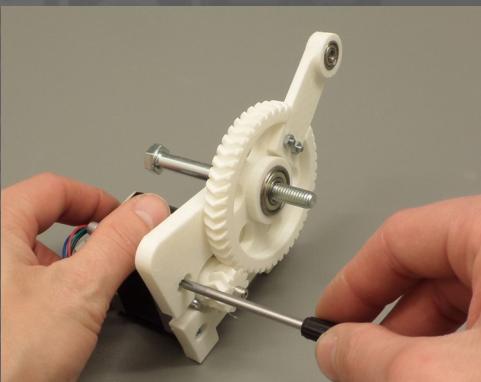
Mount the motor using M3 screws, ensuring a tight fit with the secondary gear.
